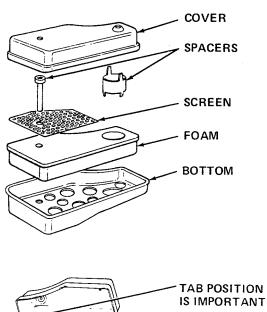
Clean Engine and Air Filter (25-Hour Care); or as required.
